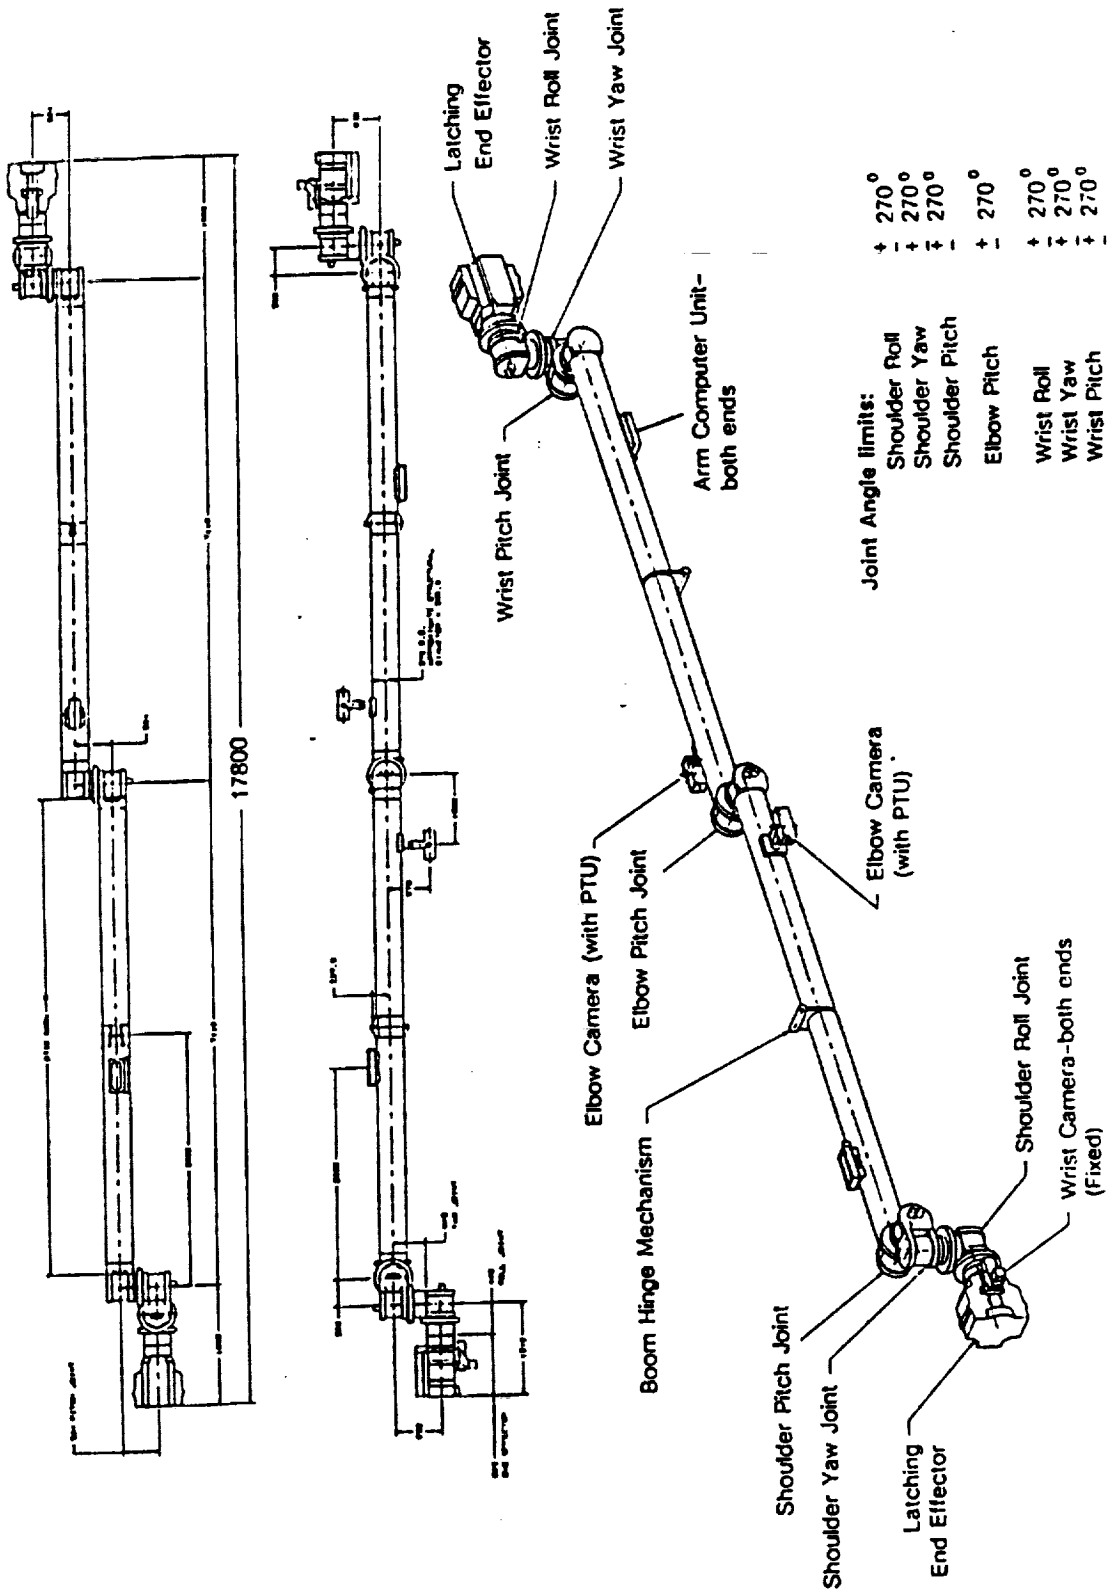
Schematic drawing of the SSRMS with dimensions.
